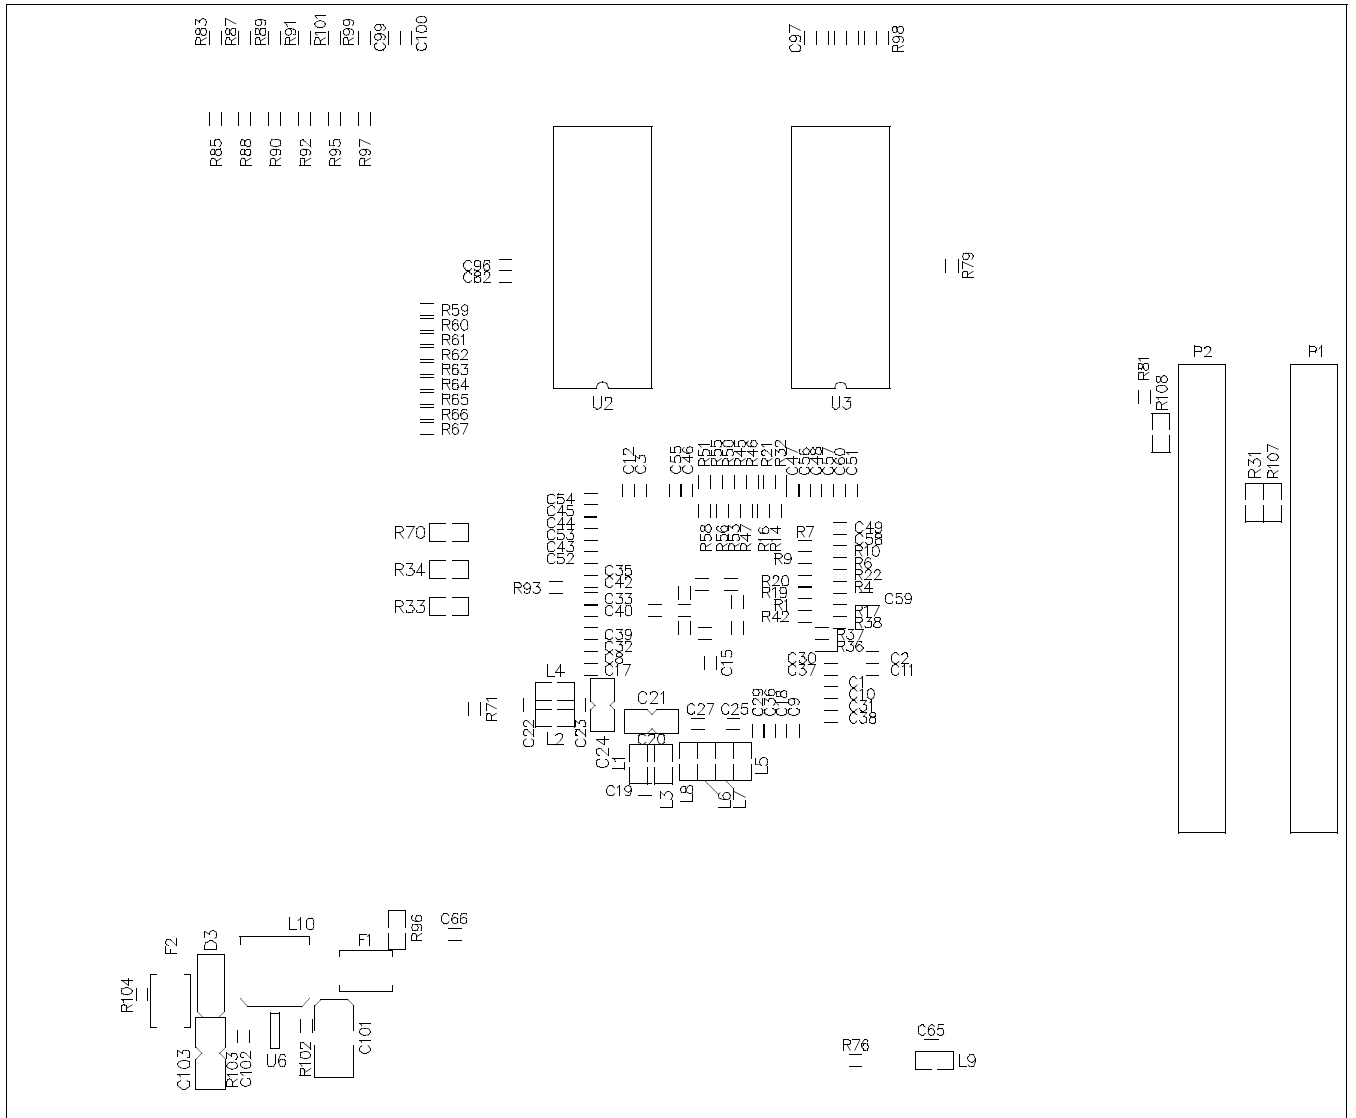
S5U13513P00C100 Board Layout - Bottom View
